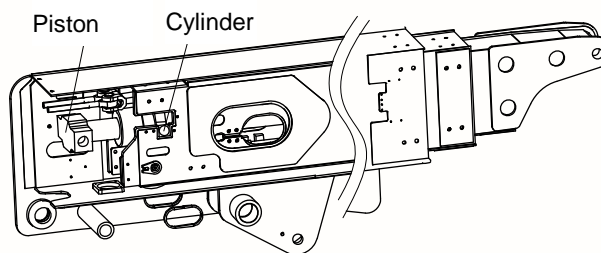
Disassembly of the pin of the telescopic cylinder
